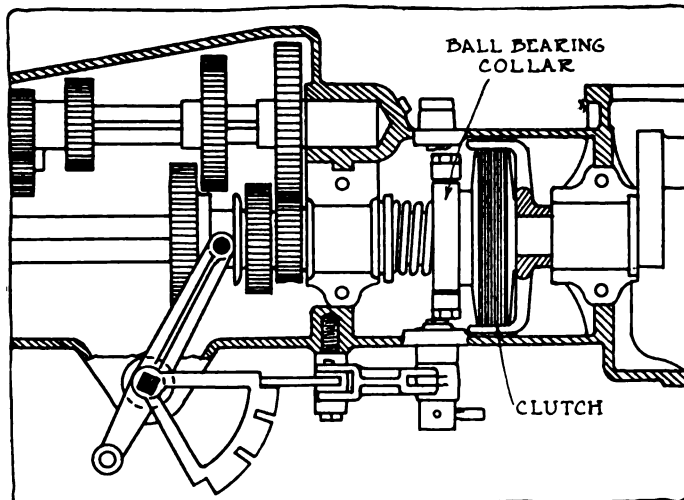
Layout of 1909 Maxwell gearset and clutch members
